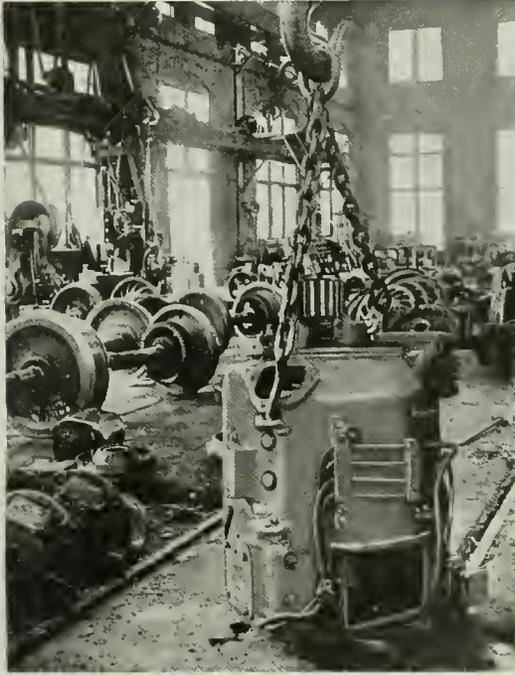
A 140-H.P. Box Frame Motor removed from truck and turned on end preparatory to lifting out armature
